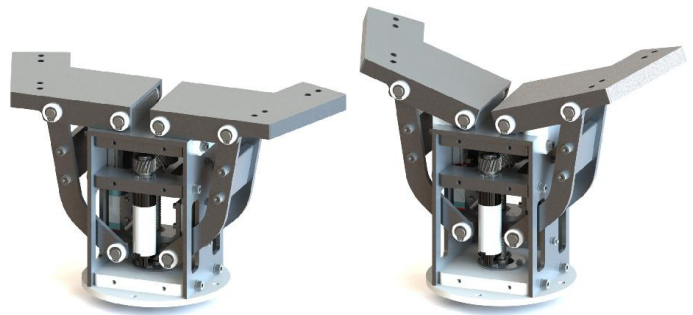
The shrug mechanism with 1 DOF – starting and final position
